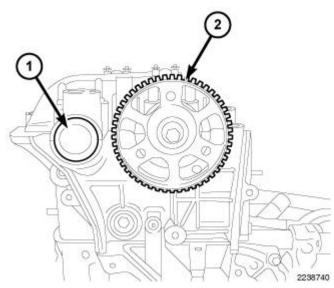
Camshaft Sprocket Courtesy of CHRYSLER LLC
